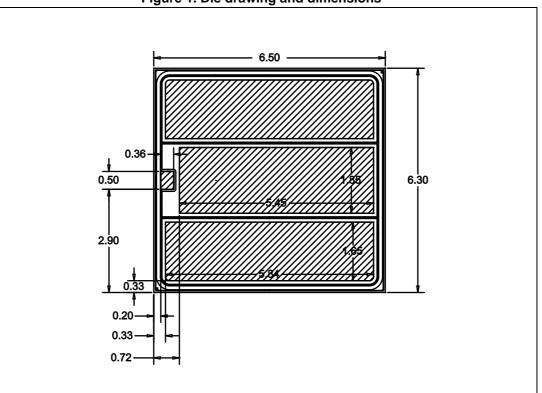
Die drawing and dimensions<sup>(a)</sup>
